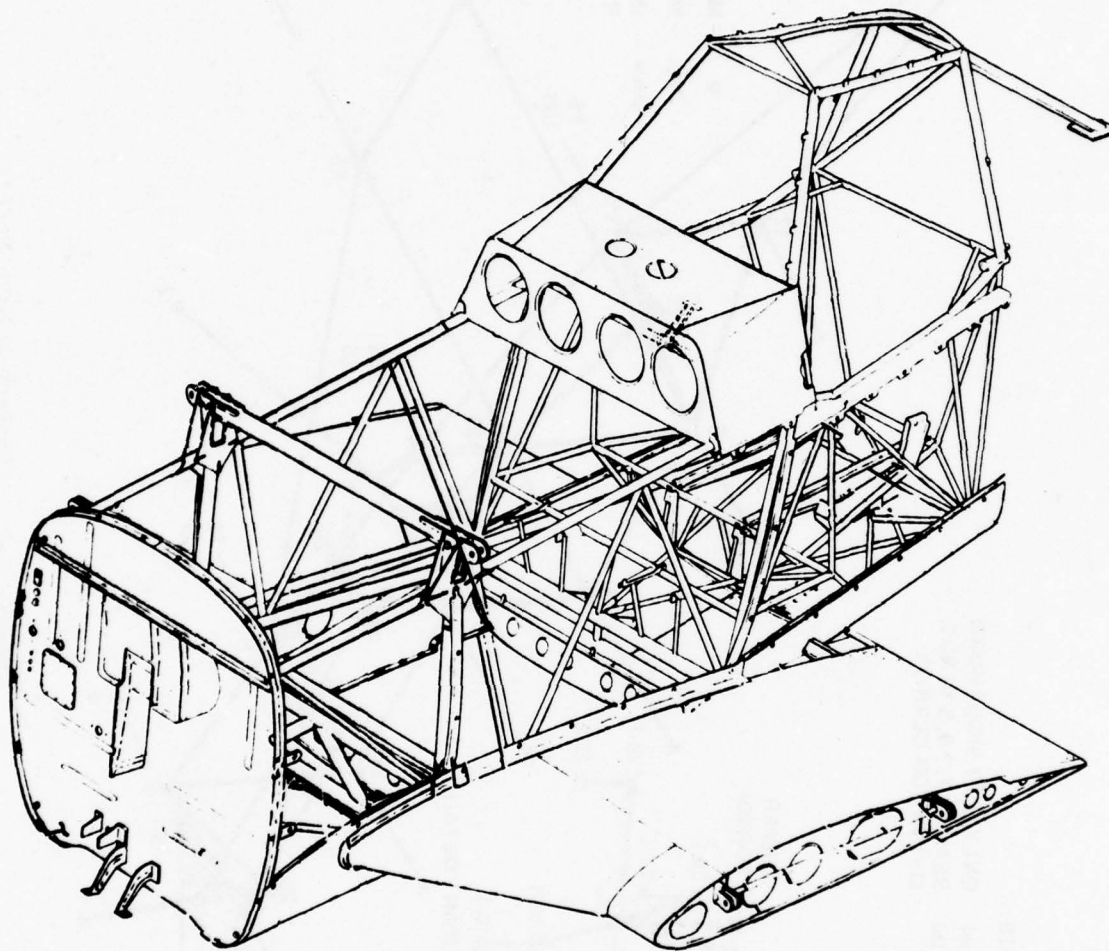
Welded Tubular Fuselage Structure
